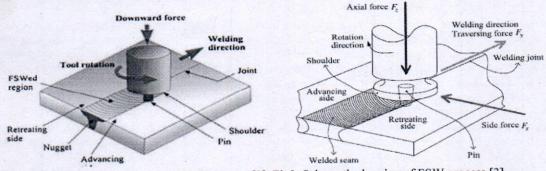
Schematic drawing of FSW process [2] Fig2. Schematic drawing of FSW process [3]
